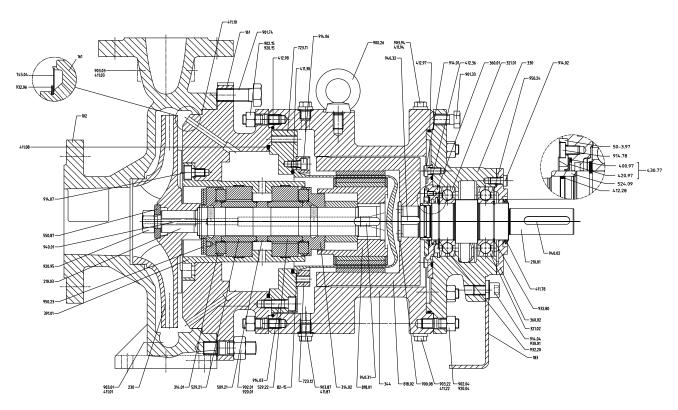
General assembly drawing of Magnochem with ceramic containment shroud and leakage barrier, bearing brackets P03/P04 MK110
